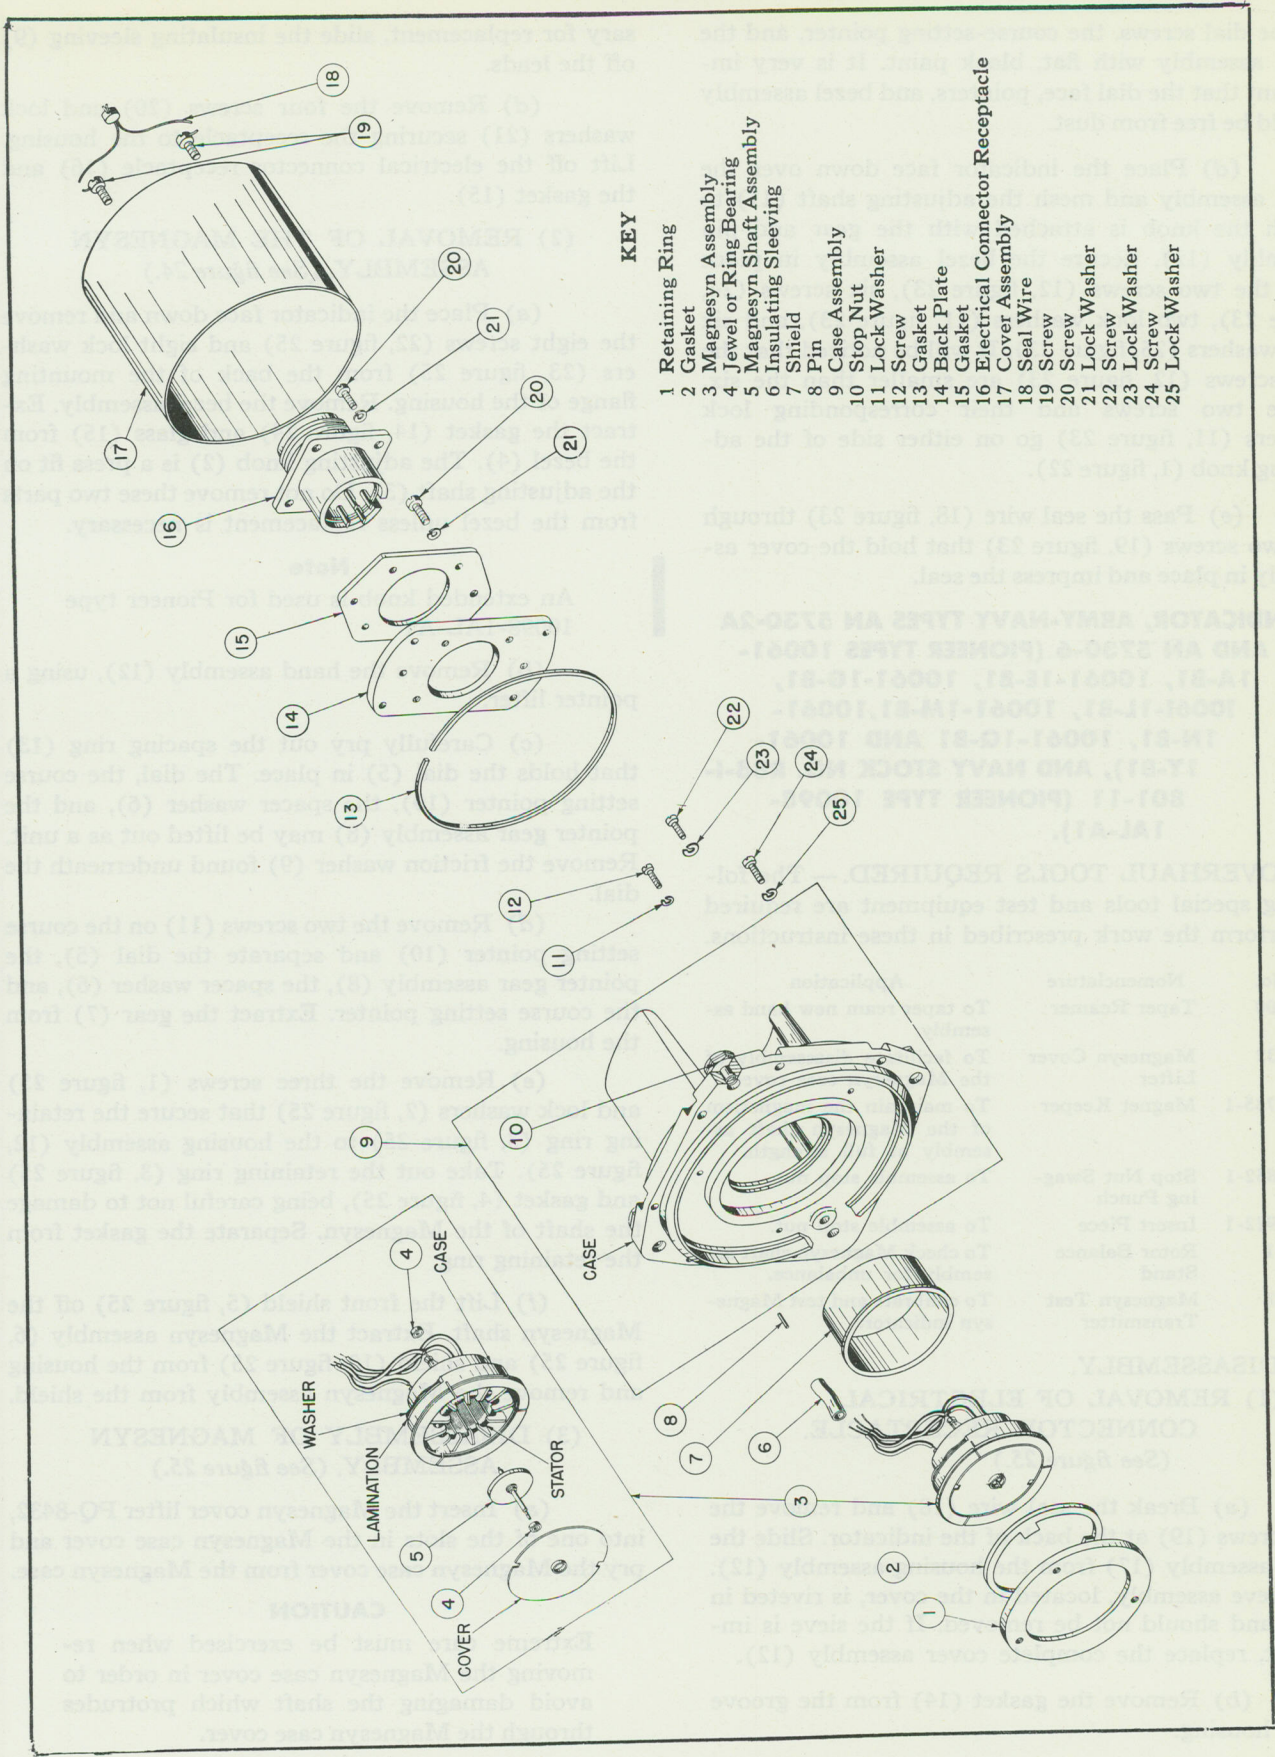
Exploded View Drawing—Main Assembly—Indicator—Types AN 5730-2 and AN 5730-6 (Pioneer Types 10061--A1)
